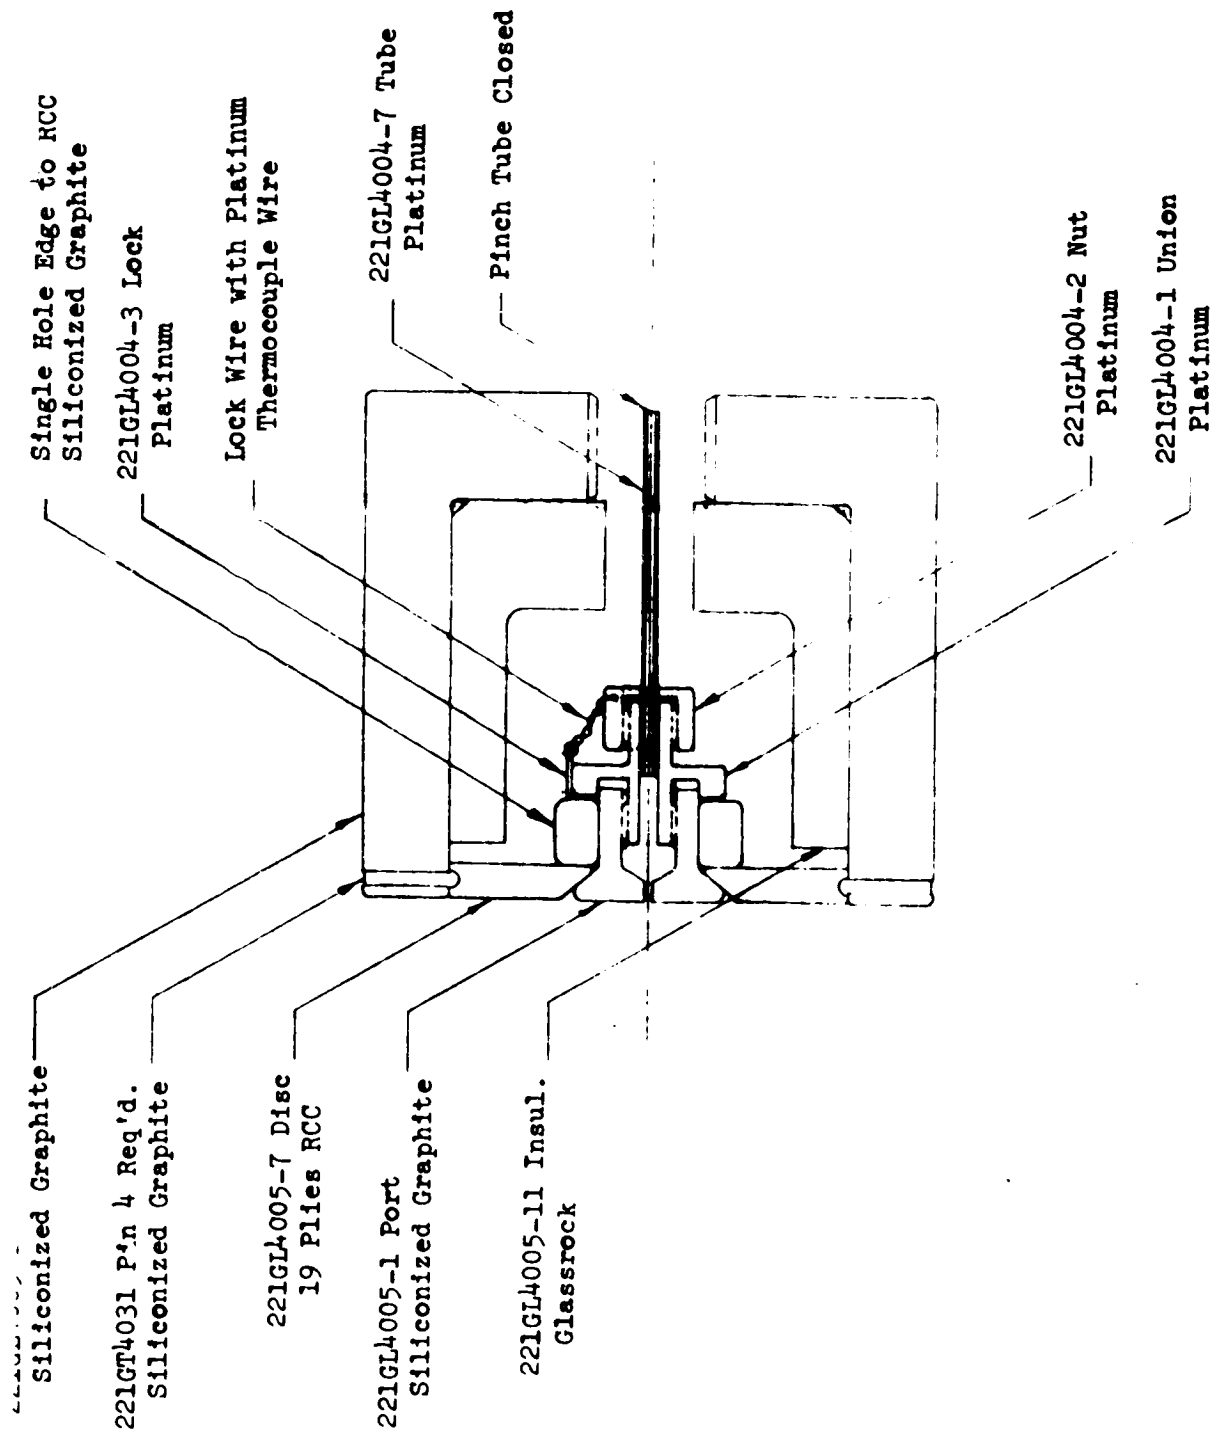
CONCEPT 6 ASSEMBLY
